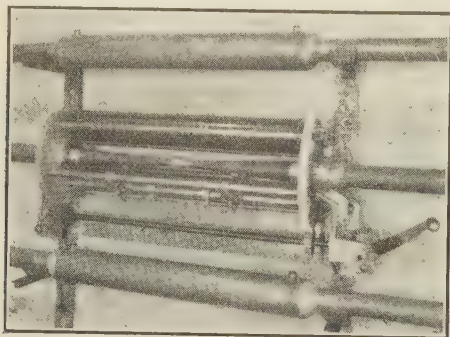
MACHINE READY TO WRAP PAPER INSULATION IN STEPS
